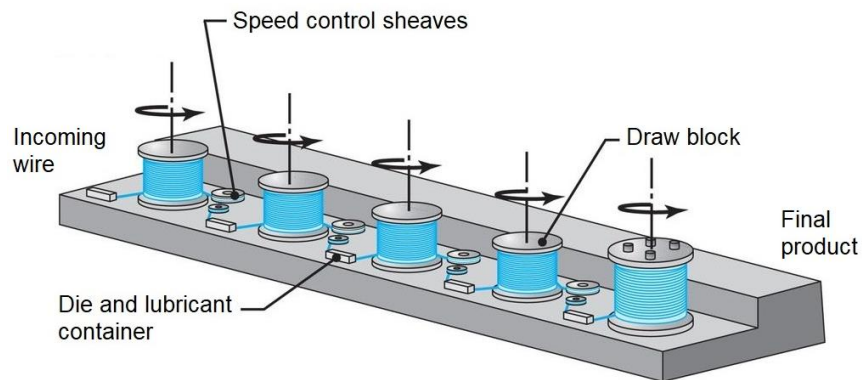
Schematic illustration of a multi-pass drawing machine [44]
